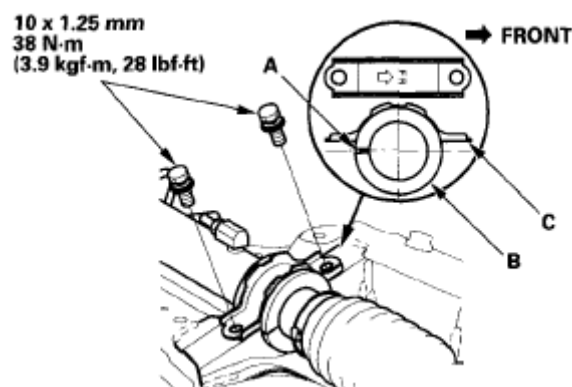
Identifying Cutout On Mounting Cushion (With Torque Specifications)
